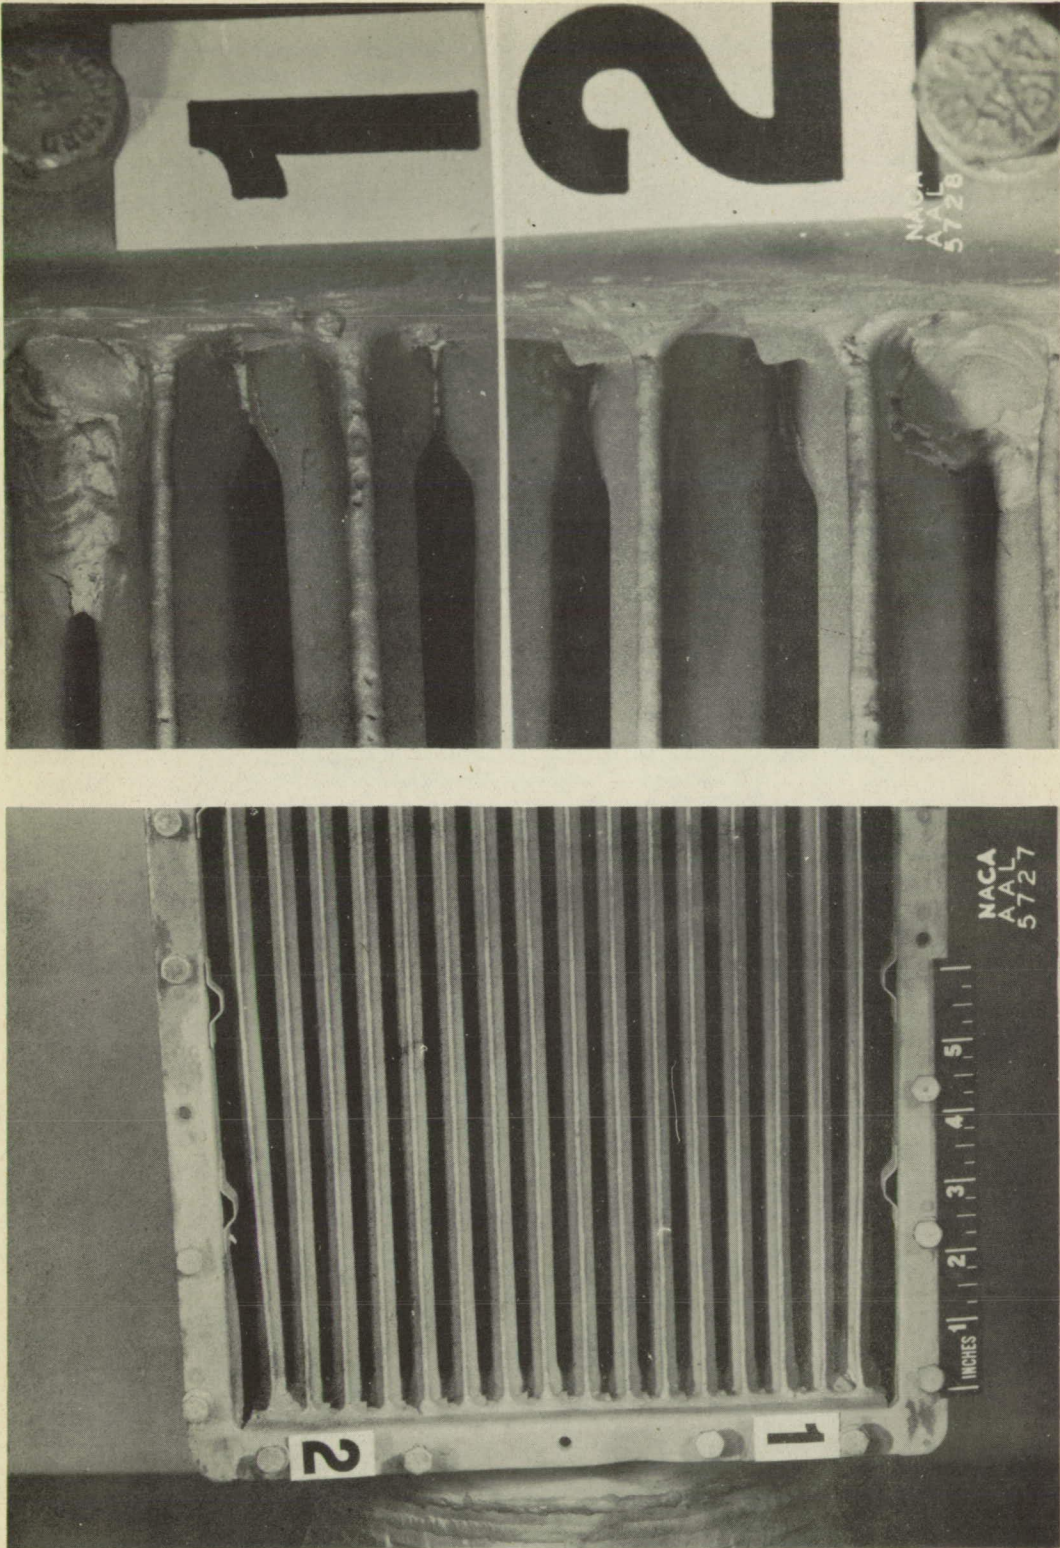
Views showing air side of right inboard heat exchanger after 173 hours of flight testing, C-46 airplane.
